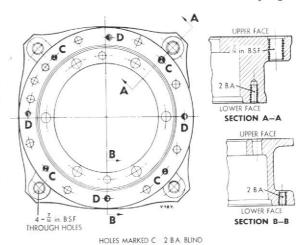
Threaded holes in starter gears casing, showing blind and through 2 B.A. holes, and ⁷/₆ inch B.S.F. holes.
